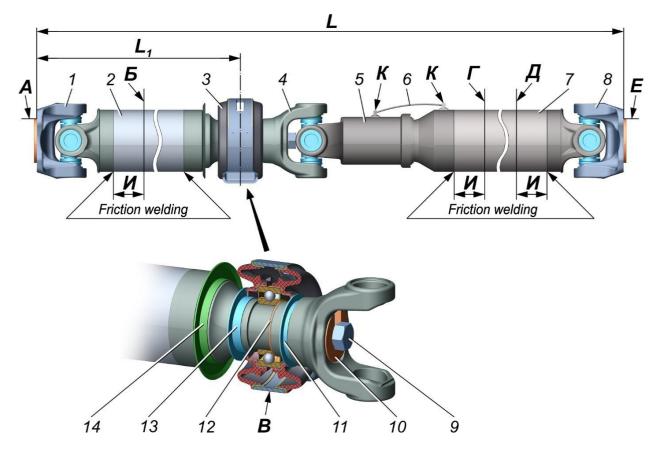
Driveline: A, C, F – balancing bases; B, D, E – balancing planes; I=76.2 mm; 1,8 – flanges; 2 – countershaft; 3 – intermediate support; 4 – splined yoke; 5 – sliding yoke; 6 – transport retainer; 7 – rear shaft; 9 – bolt; 10 – U-washer; 11, 12, 13 – deflectors, 14 – washer.
